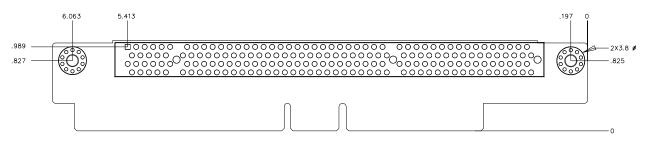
1-Slot PCI Riser Mechanical Drawing
